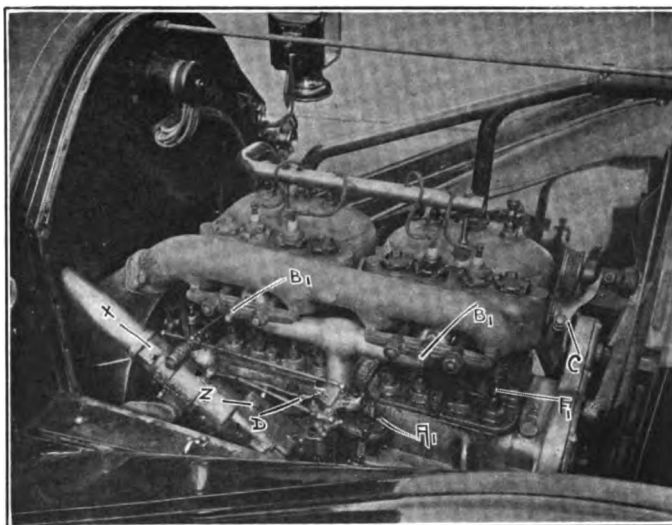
Intake side of motor, showing carbureter, steering adjustment, fan belt, tightening nut and adjusters for valves
